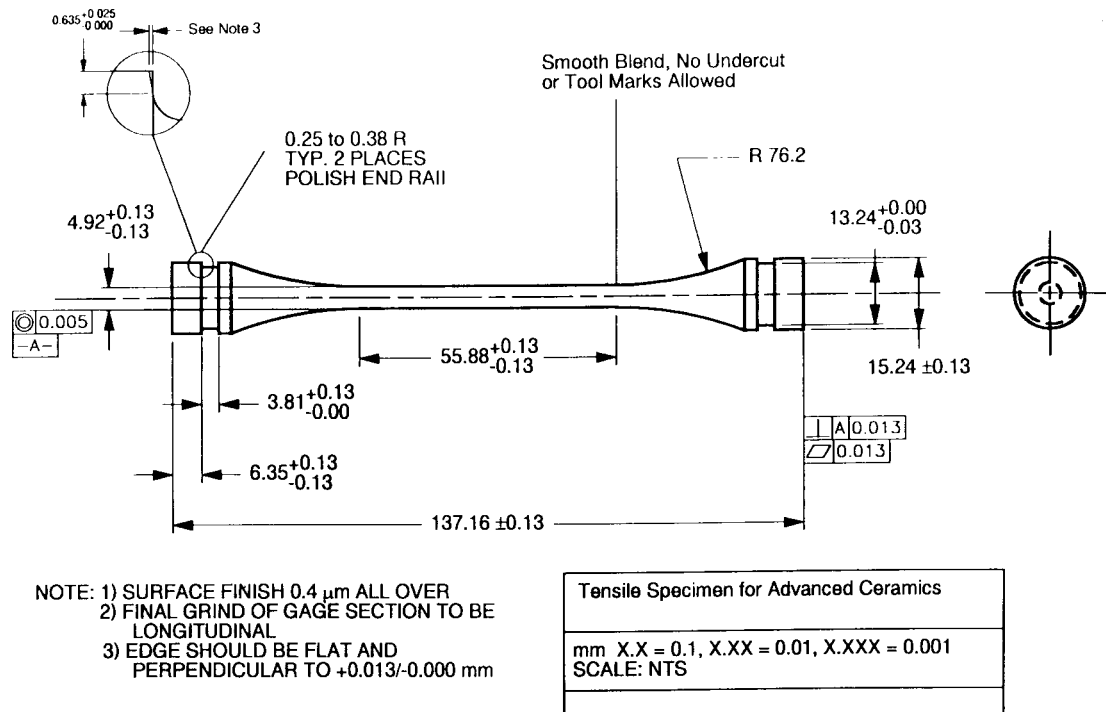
Example of a Cylindrical, Button-Head Tensile Specimen (12)
